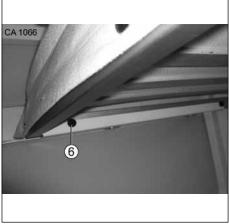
Removing and reinstalling the front Fig. 29 Removing and reinstalling the rear bunk bed bunk bed
